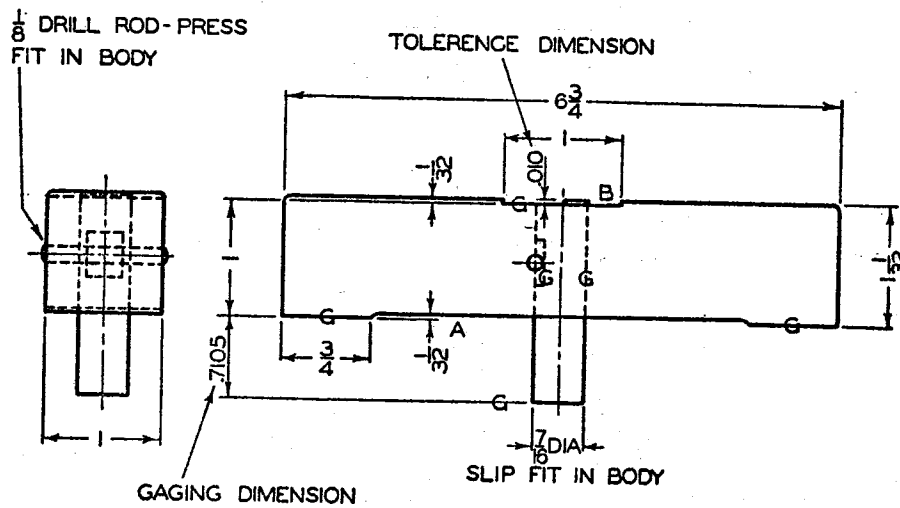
Recommended design and method of dimensioning short flush-pin gage.
